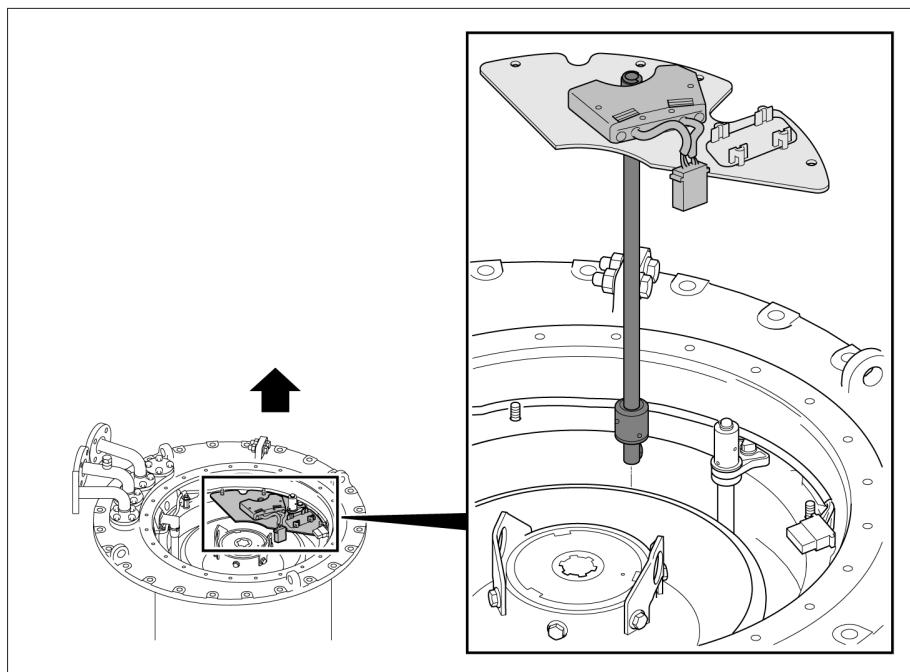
Tap-change supervisory control with mounting plate and drive shaft
